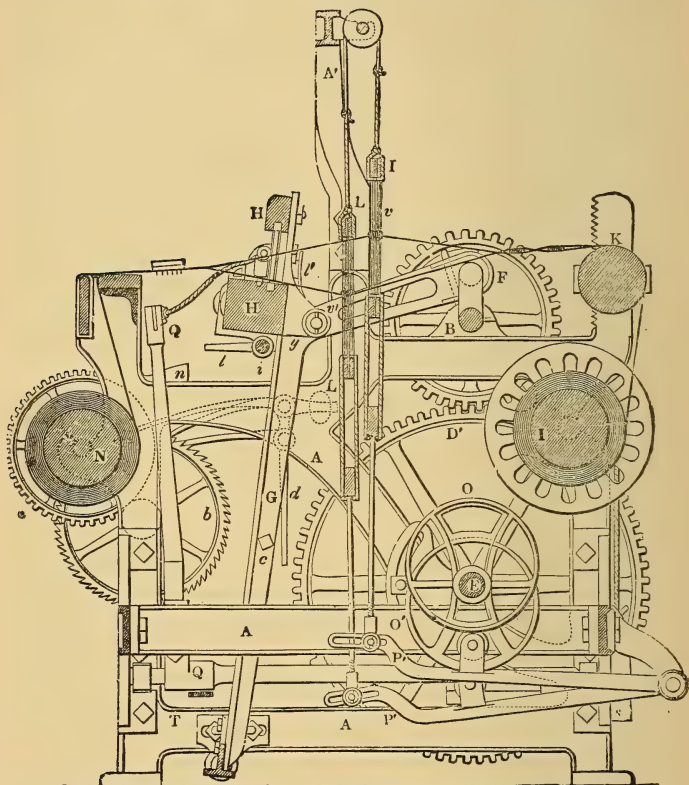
ROBERTS' LOOM. "FIRST SIDE ELEVATION ;" 1830.
